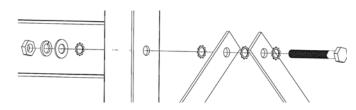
Cross brace to frame assembly when three or more frames are to be used
